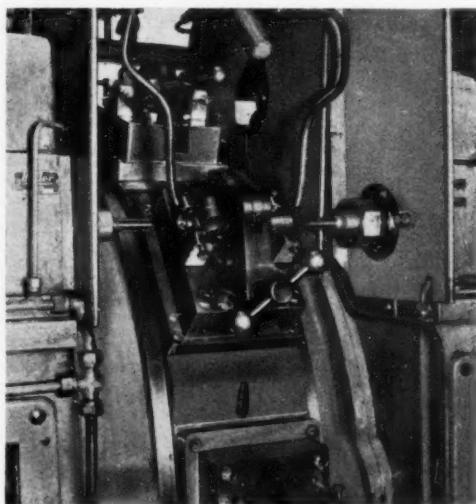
Close-up View of the Indexing Drum, from Rear of the Hüller Machine, Showing the Fixtures
